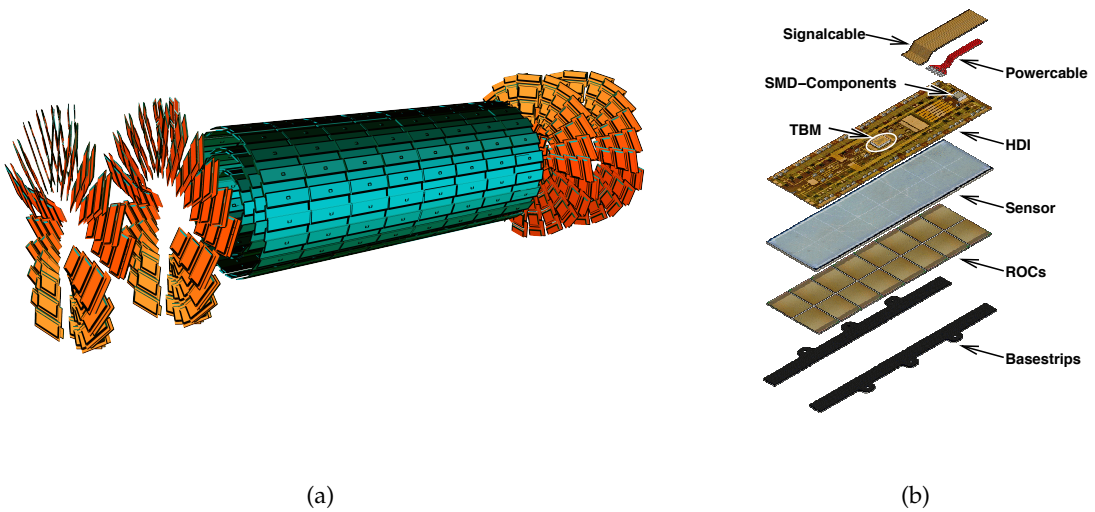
Sketch of the CMS pixel detector (a) and exploded view of a barrel module (b).
